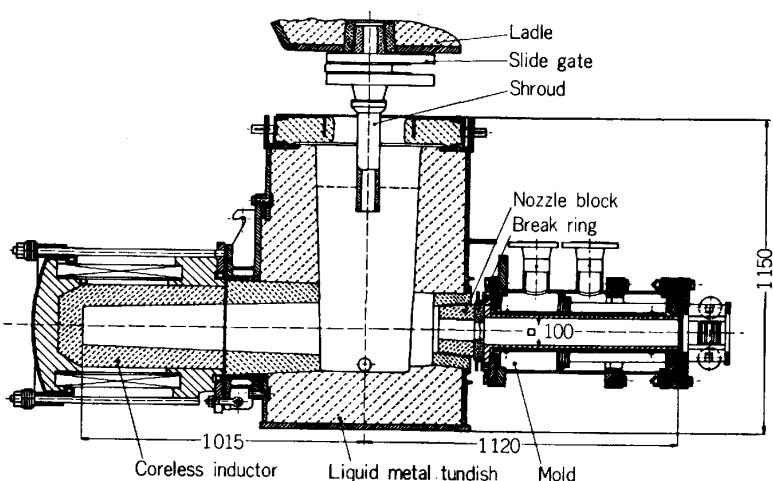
Sectional view of tundish-mold arrangement developed by Krupp⁴⁰⁾.
